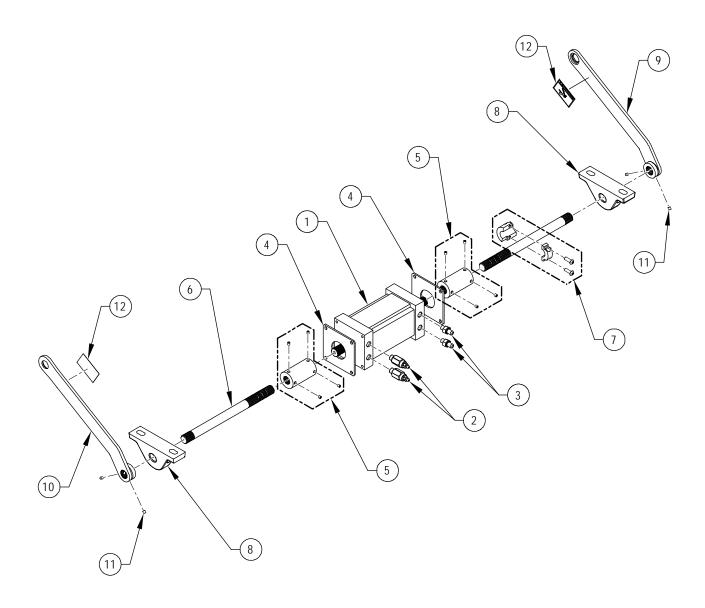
BR2C-SERIES ROTARY ACTUATOR ASSEMBLY
